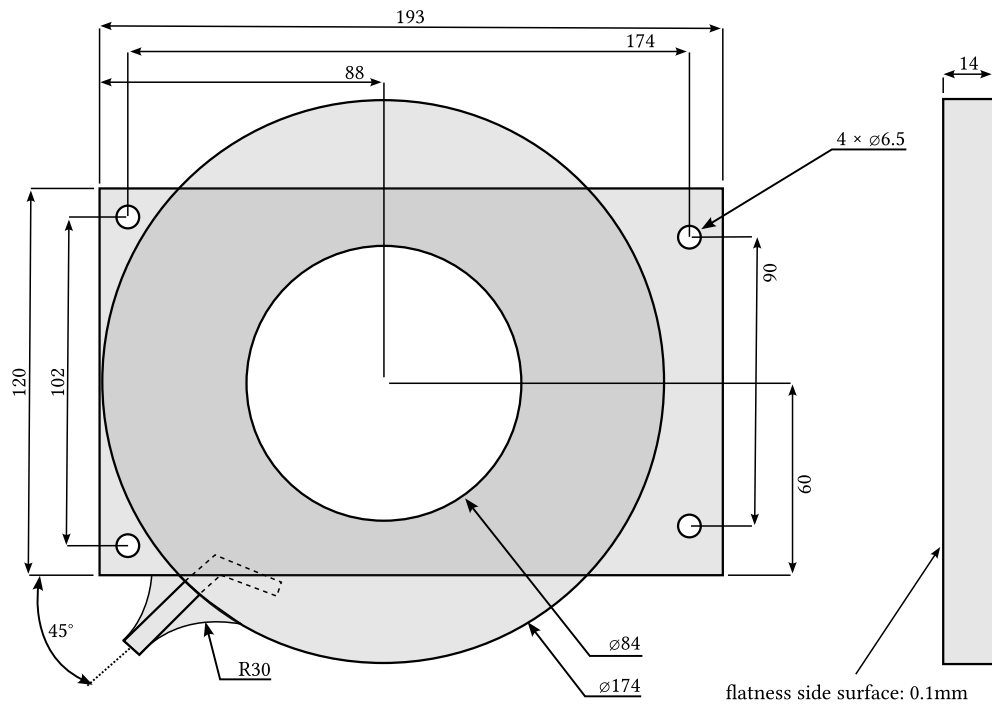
Technical drawing of a coil stack with 8×2 windings of hollow-core Kapton-insulated copper wire, cast in epoxy. The four through-holes are used for mounting. In the final magnetic field coil design, we utilize three of these stacks for the bottom coil, and another three for the top one. The two connection wires extend another 400 mm, such that we are able to place the connectors for water and current supply at an appropriate distance.
